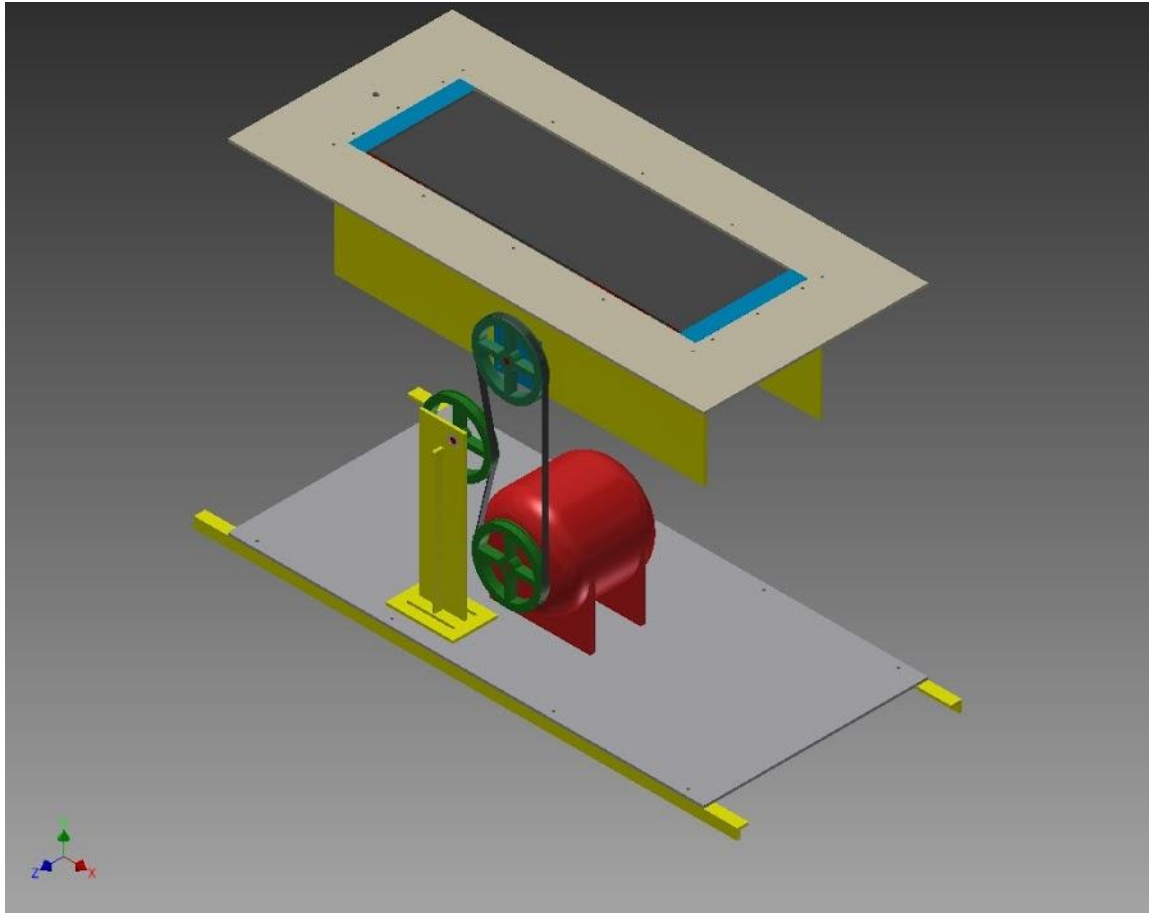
Moving bed assembly as drawn in Autodesk Inventor.
